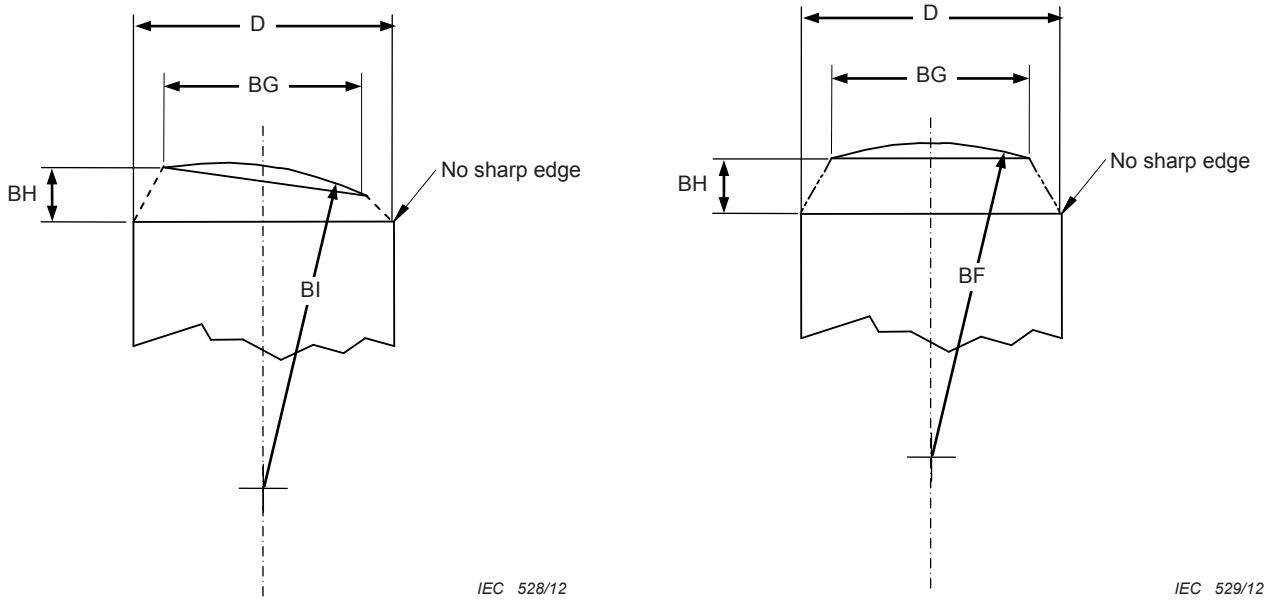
Detail A of figure 1 APC/PC endface geometry, expanded view drawings not-to-scale
